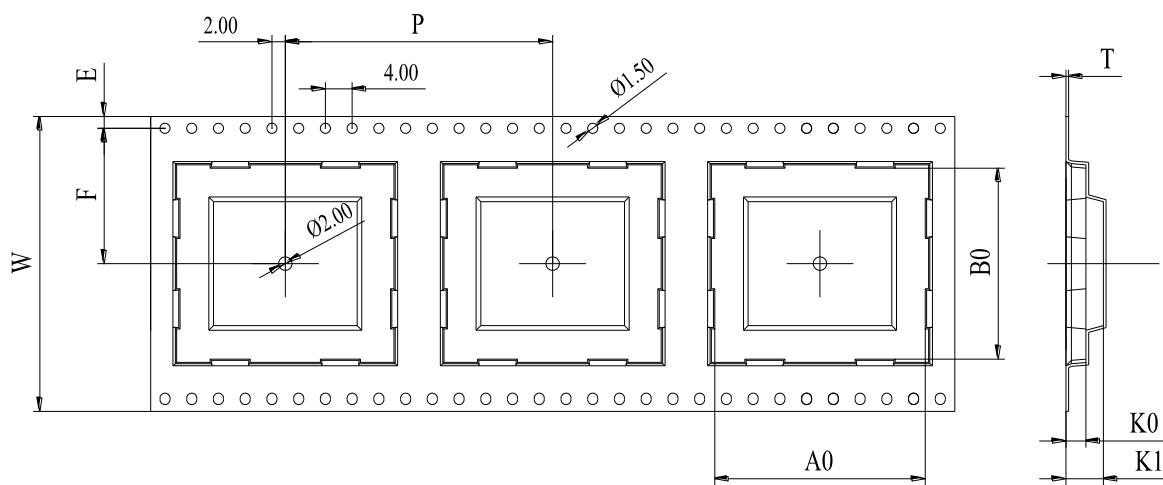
Carrier Tape Dimension Drawing (Unit: mm)
